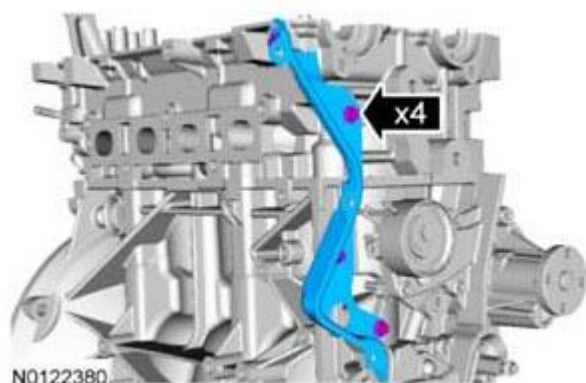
Locating Bolts And Timing Belt Cover Backplate
